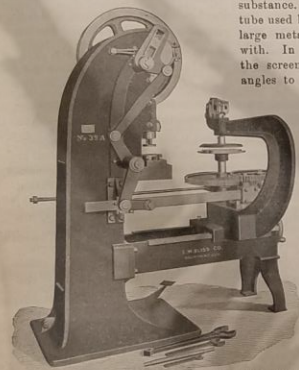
NOTCHING PRESS WITH CLAMPING ARM, SHOWING RACK AND PINION MECHANISM.
